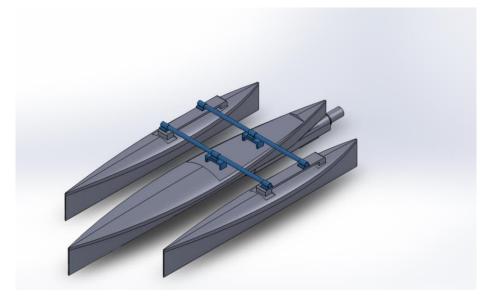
Basic crossbeam concept that require detachment of parts to access the hatch
